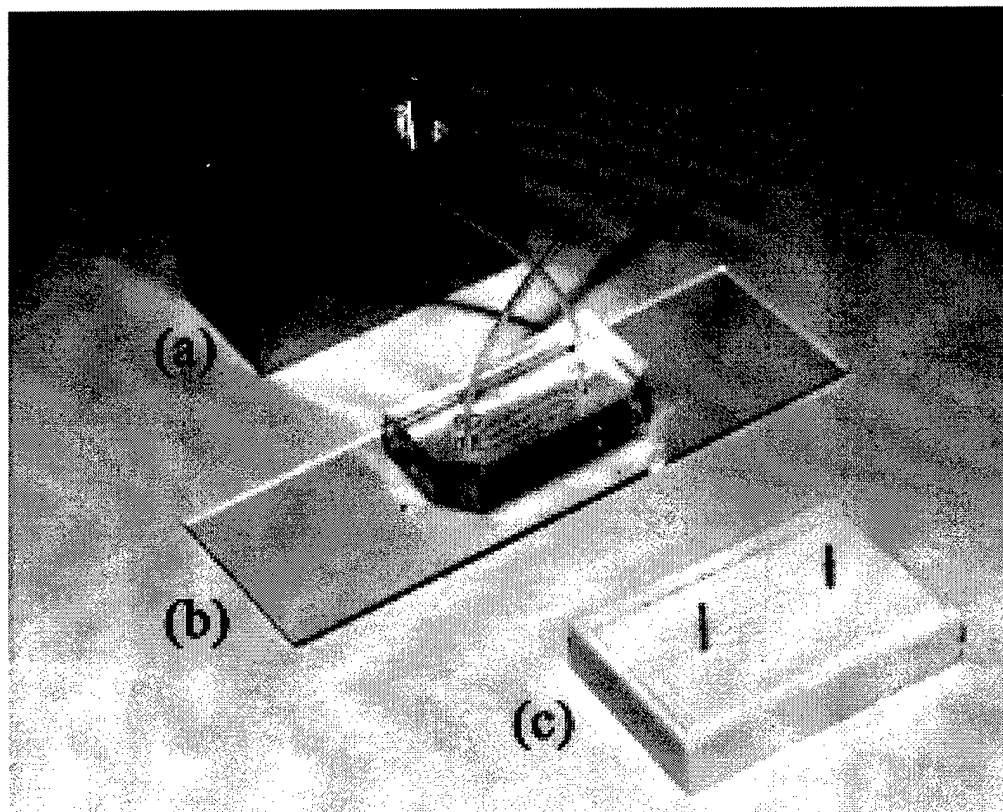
Micromolding system: (a) 6061 T-6 aluminum mold top (b) Casted PDMS microfluidic device(c) Polyurethane mold bottom.
